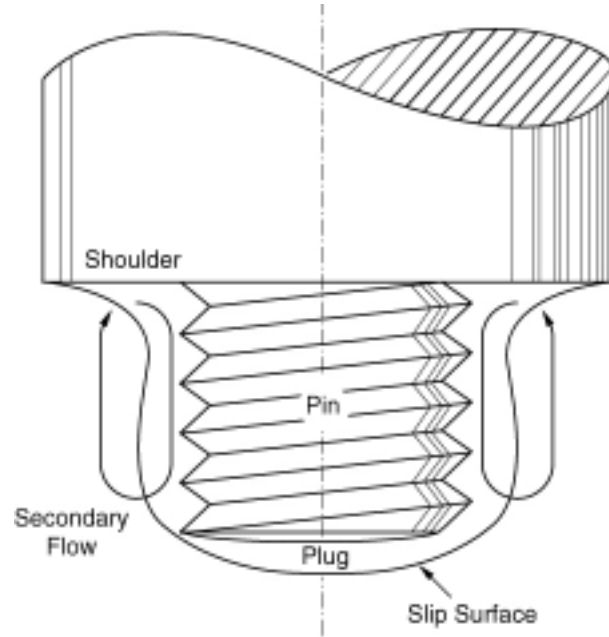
The rotating plug model comprises: (1) a rapidly rotating plug of metal attached to the pin-tool and slipping with respect to the workpiece on a cylindrical surface surrounding the pin-tool, and (2) a relatively slow circulation driven by the threads surrounding the pin as a vortex ring.
